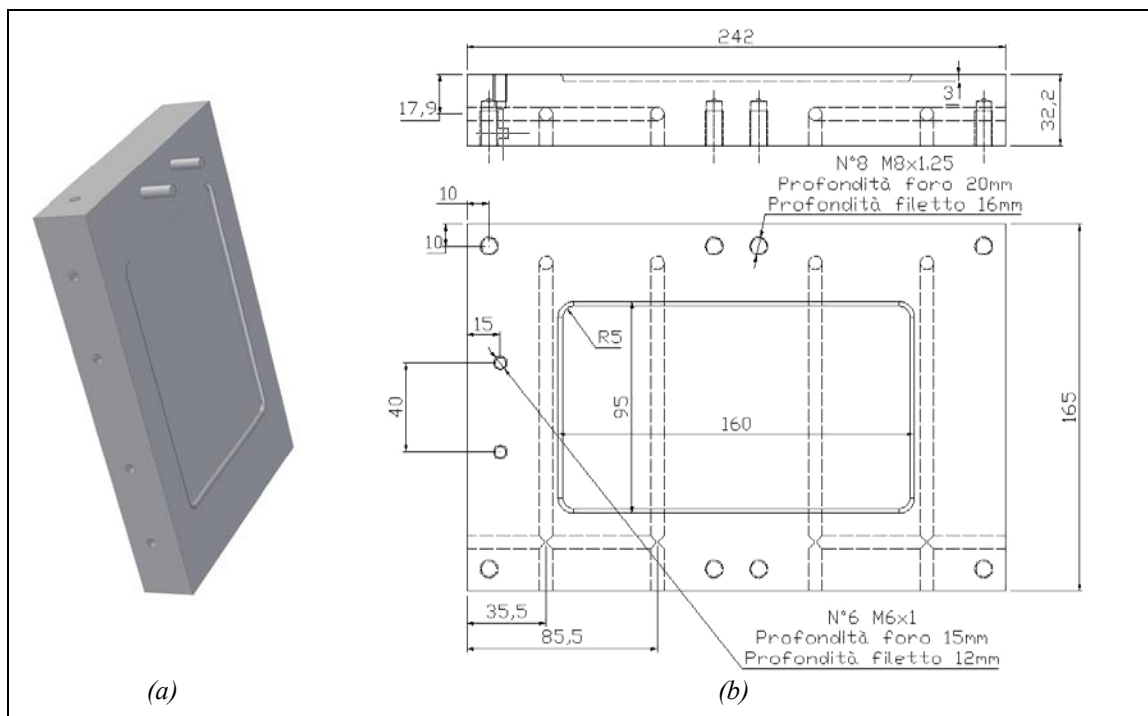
The mobile insert: (a) 3D model; (b) working drawing.
